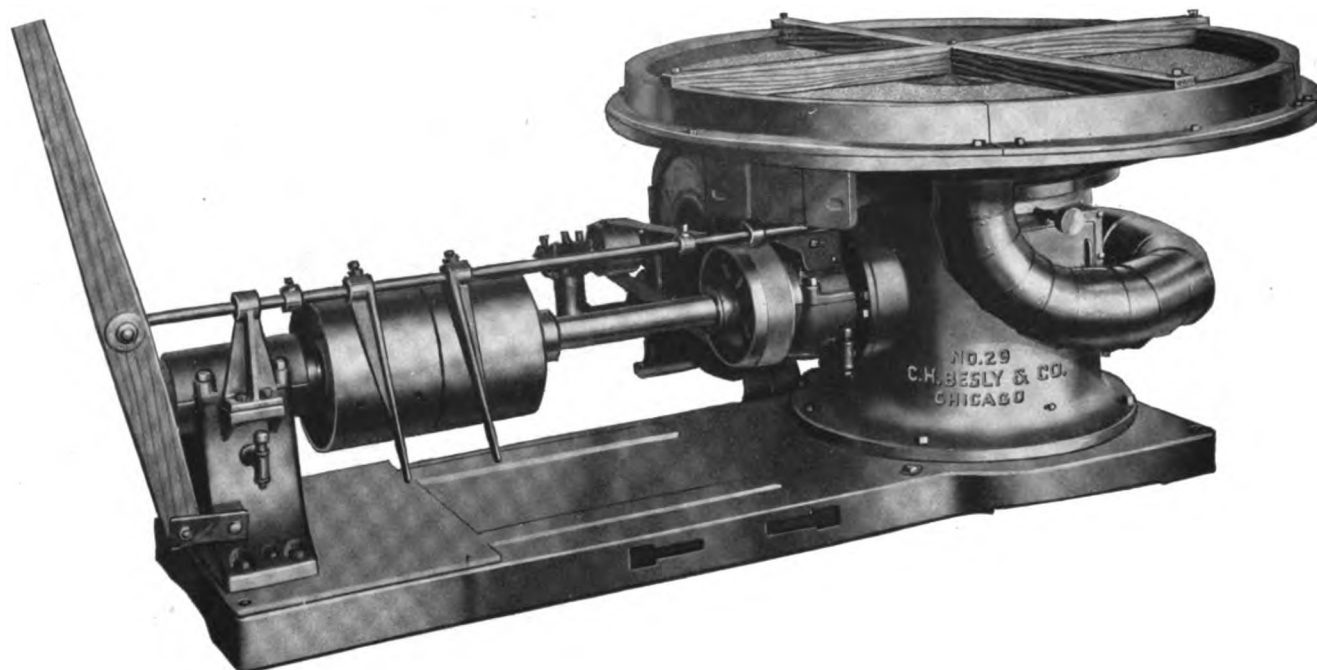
Besly No. 29 Gravity Feed or Vertical Spindle Grinder, Ring Oiling
